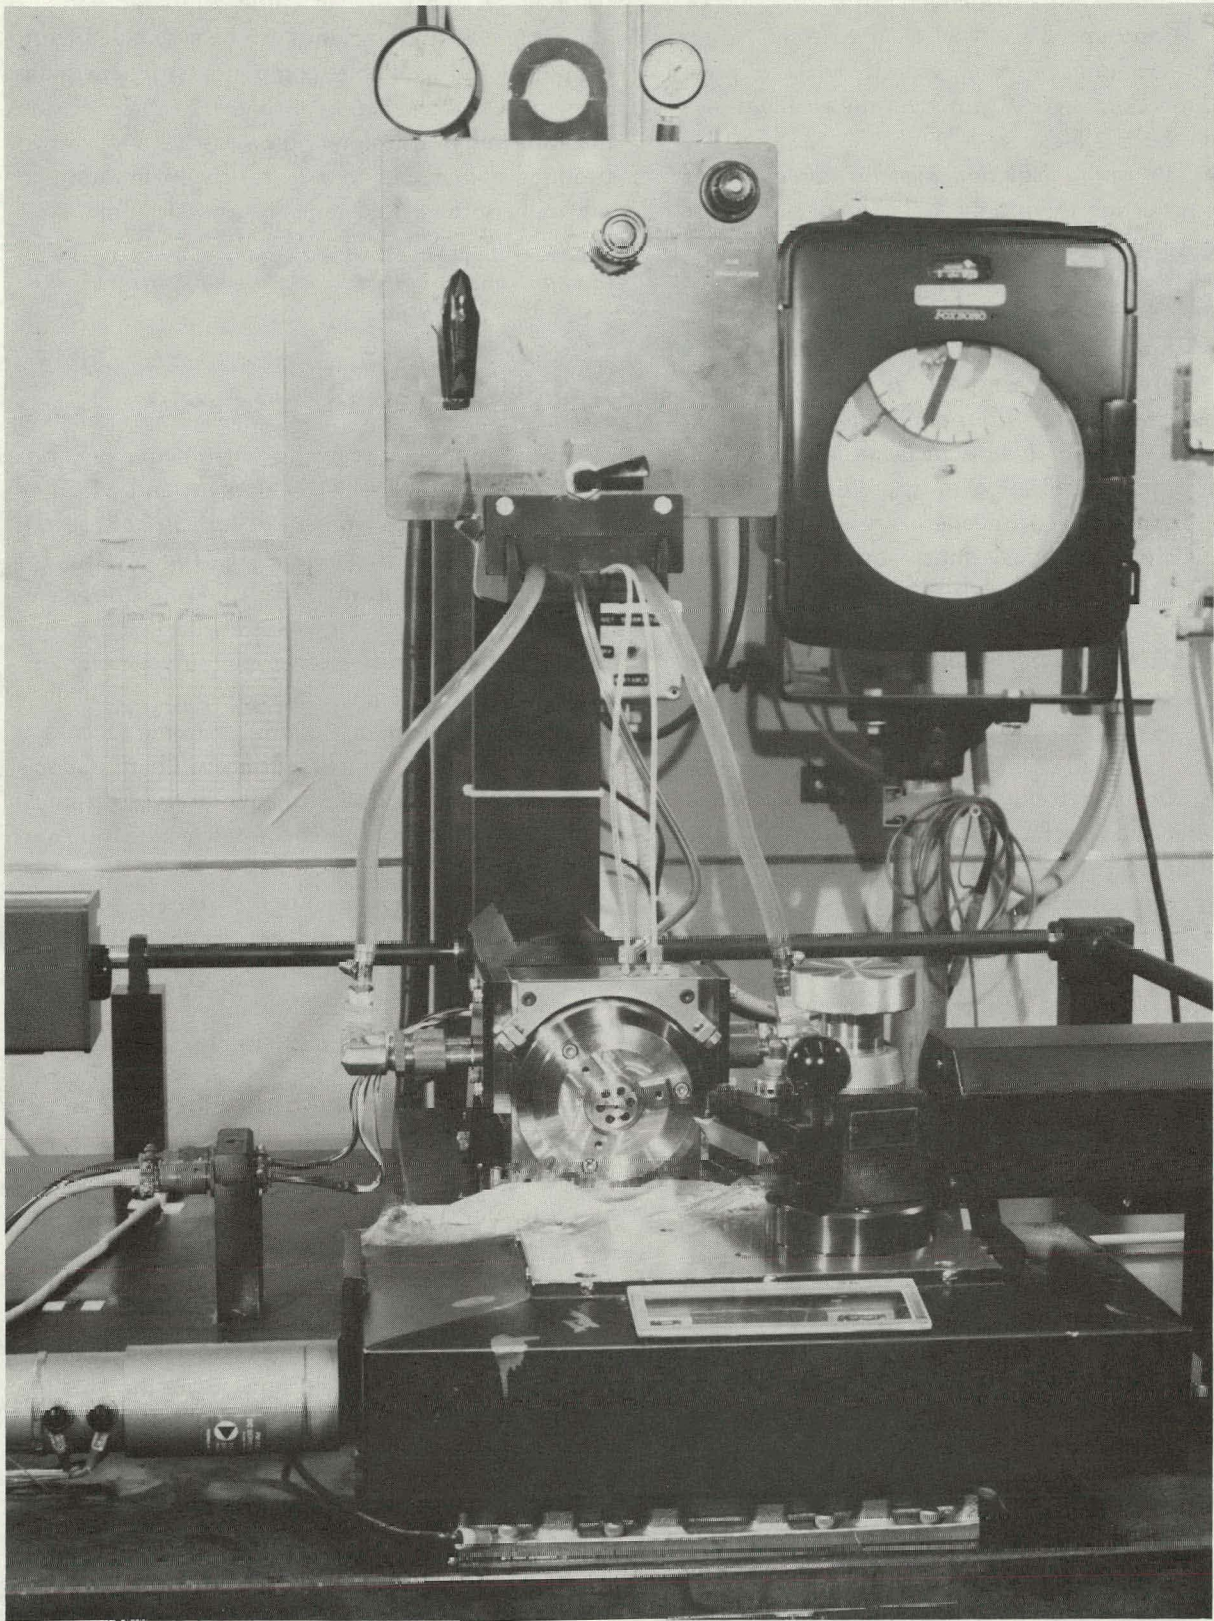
The Baby Optics Diamond Turning Machine, now boosting part production in the Materials Fabrication Division.
